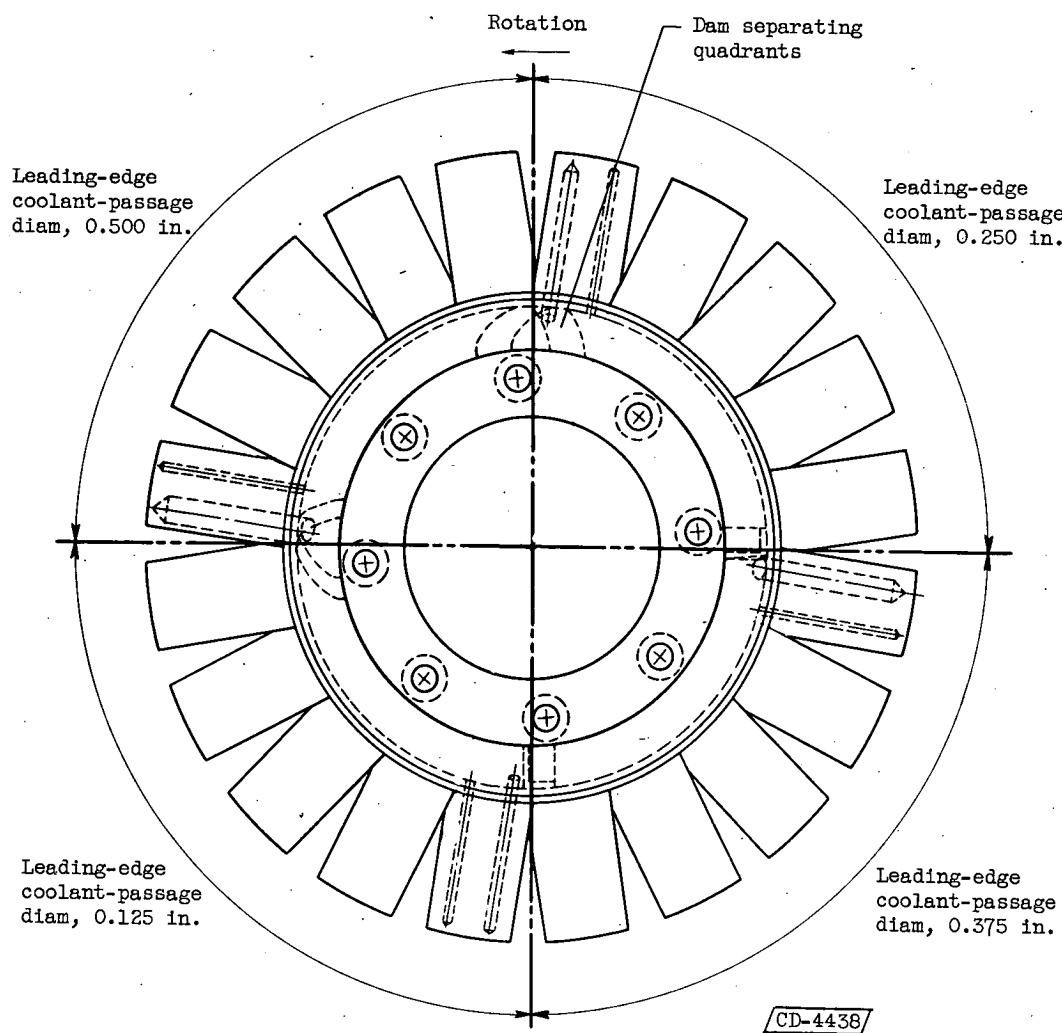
Schematic diagram of turbine rotor showing quadrant division and dams for separating quadrant coolant.
